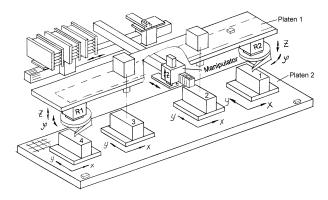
Multi-robot system for the forming of wire interconnections in the assembly of integrated circuits: 1,2,3,4-x, y planar robots.
